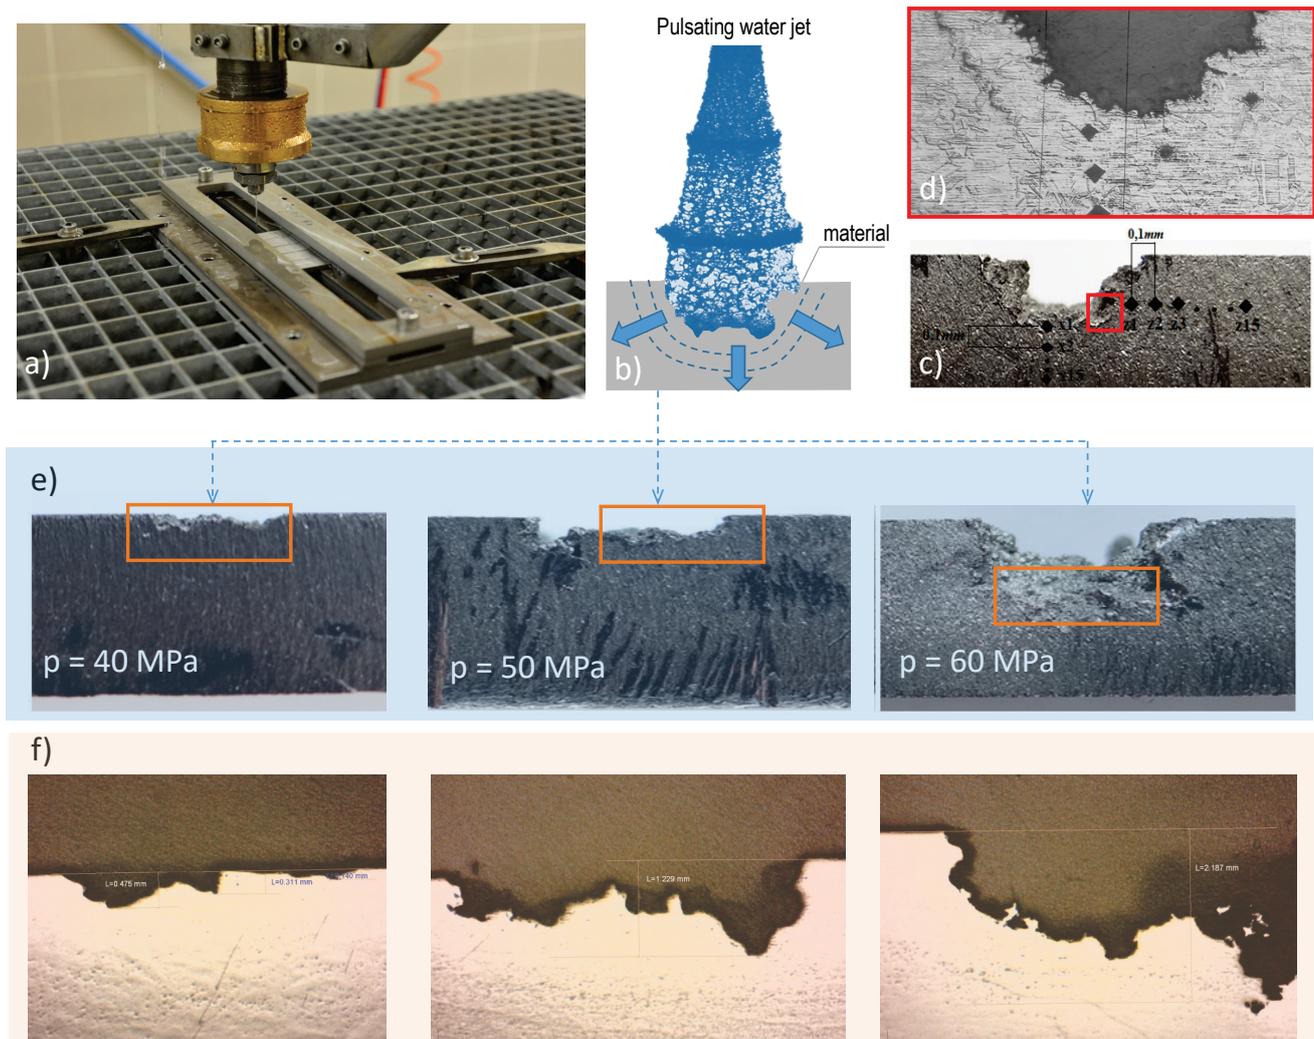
Experimental setup and measurement a) PWJ cutting head and samples, b) principle of PWJ disintegration, c) measurement method, d) austenitic structure of the AISI 304 material, e) traces on AISI created under $p = 40, 50$ and 60 MPa, f) photographs of polished sections
